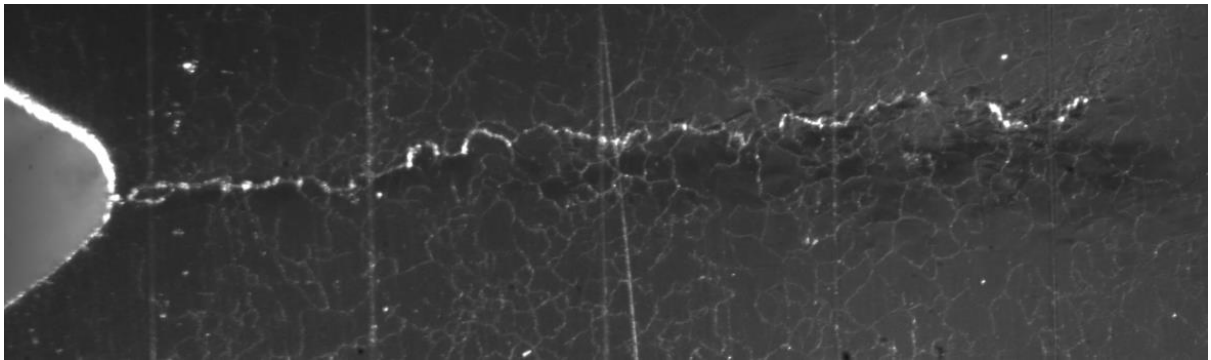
XY9 fatigue crack (to failure)
